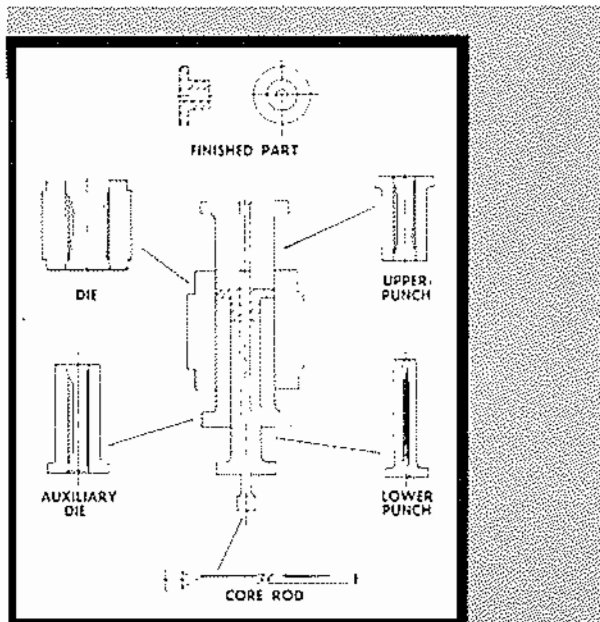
TOOLS FOR PRESSING A 2 LEVEL BEARING
